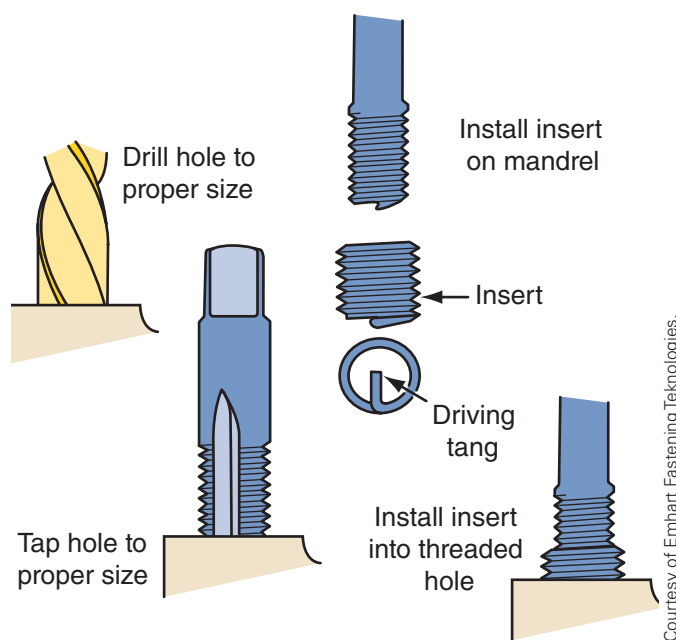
Using a threaded insert (helicoil®) to repair damaged threads.
